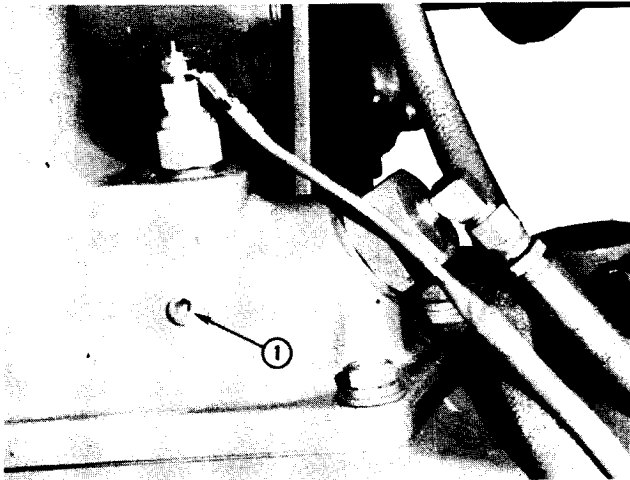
, (N11949). Glow plug inspection hole — N/NT-885 Engine
